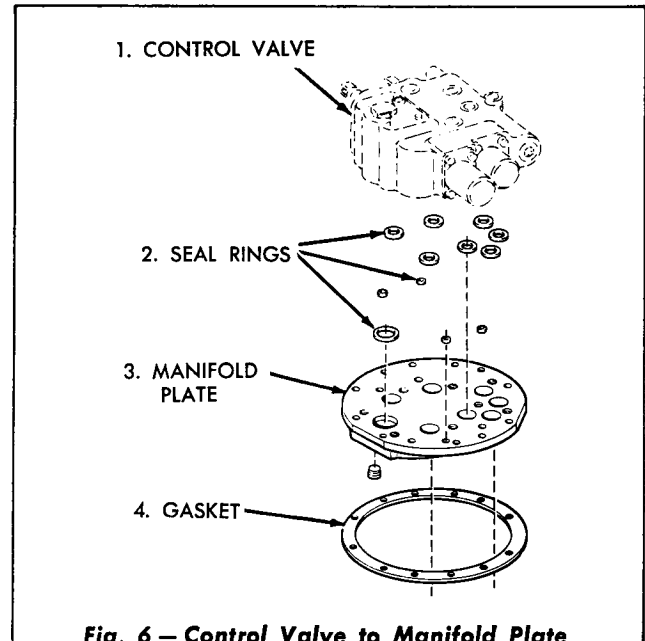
Control Valve to Manifold Plate Seal Rings
